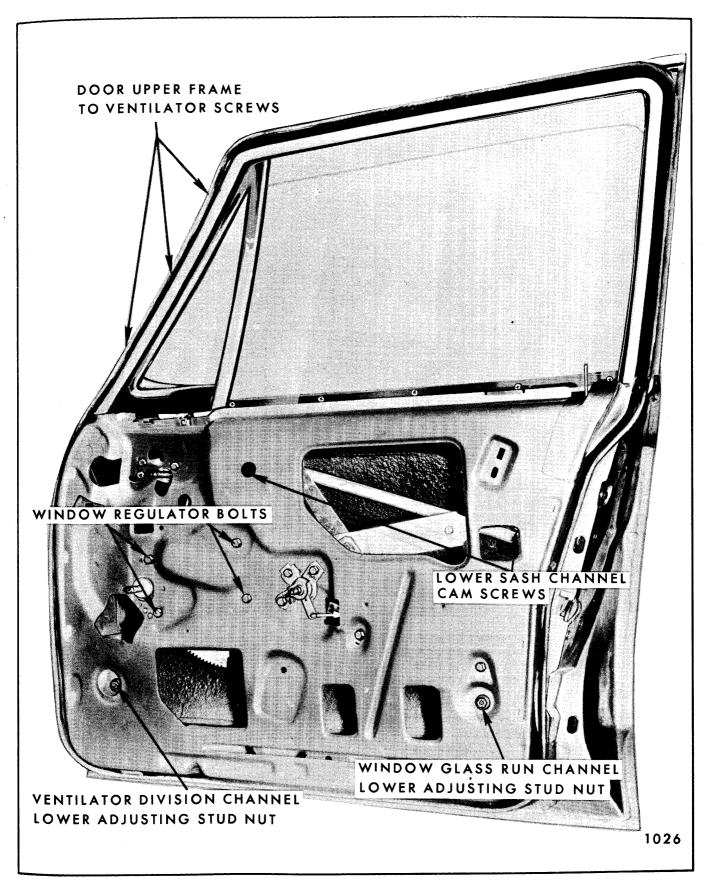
Door Ventilator and Regulator Attachment - "B & C" Closed Styles
